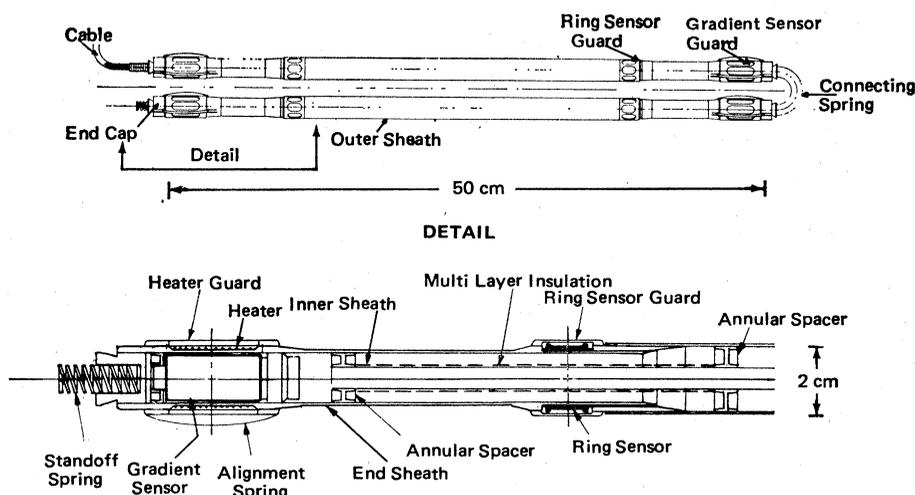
(Top) The heat flow probe, which consists of two tandem 50-centimeter sections, is shown with the sections folded as they are in their flight package. (Bottom) A detailed drawing of one end of a probe section shows the arrangement of sensors and heaters.
